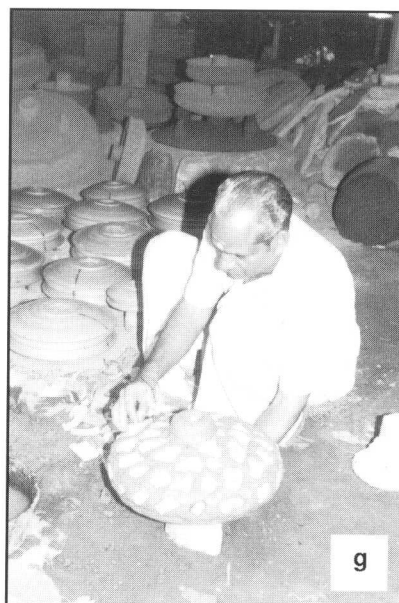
(g) Fixing broken pieces of used mould as reinforcements
